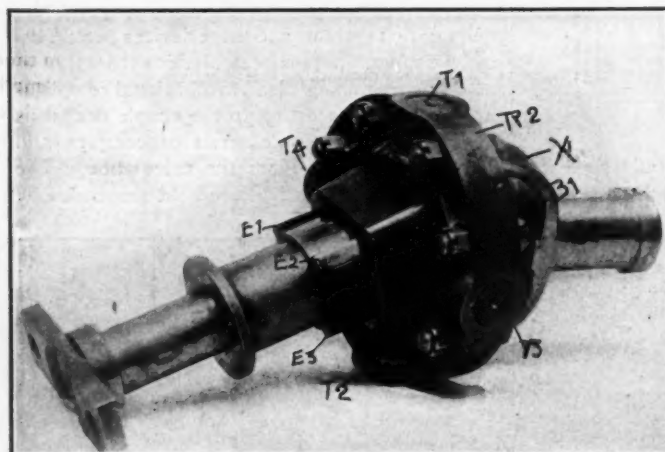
Presenting universal joint with grease-tight housing removed, indicating liberality of bearing surfaces and efficient slip joint
